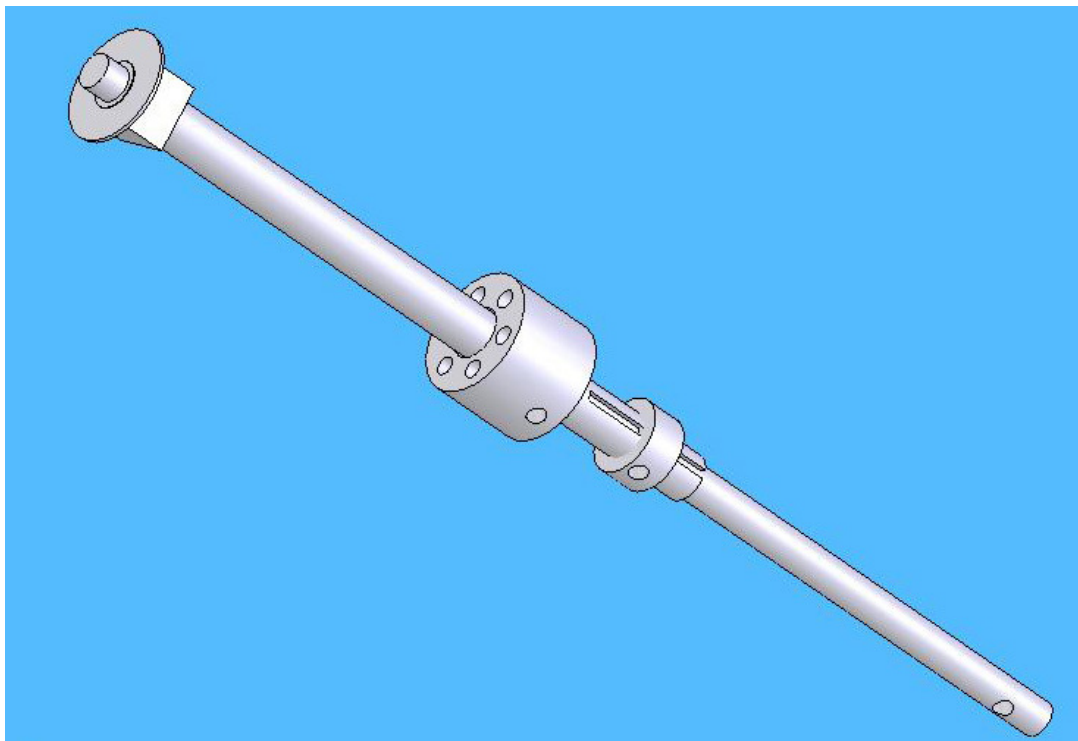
CAD drawings of tibial jig assembly minus rotation disc and tibial tray
